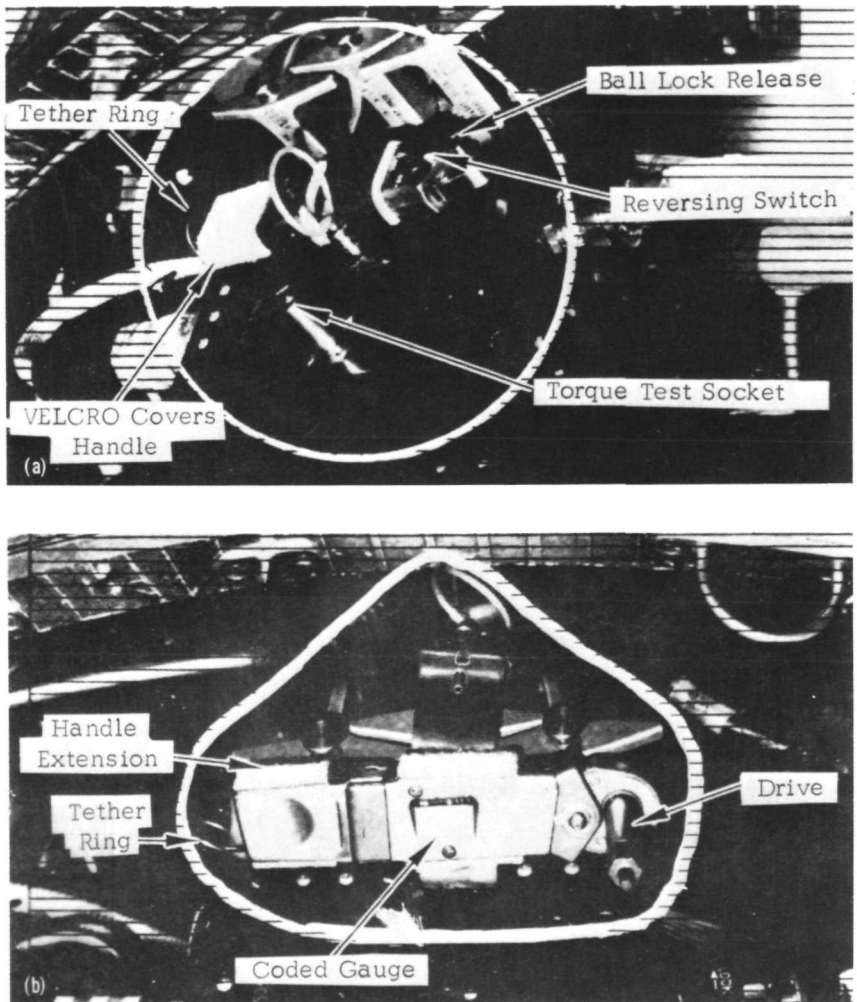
Apollo torque wrench. (a). Top view. (b) Bottom view.
